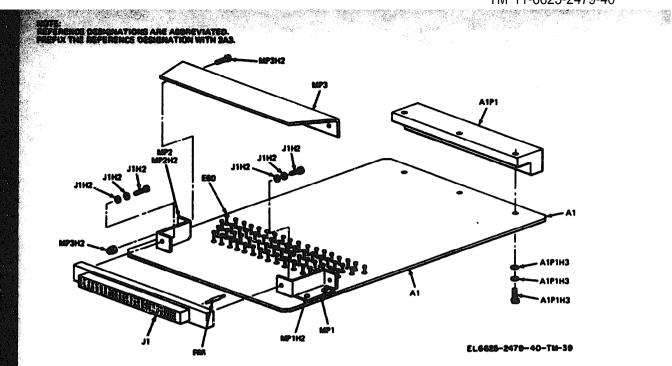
Extender, Circuit Card MX-3966/AYM, parts location.
